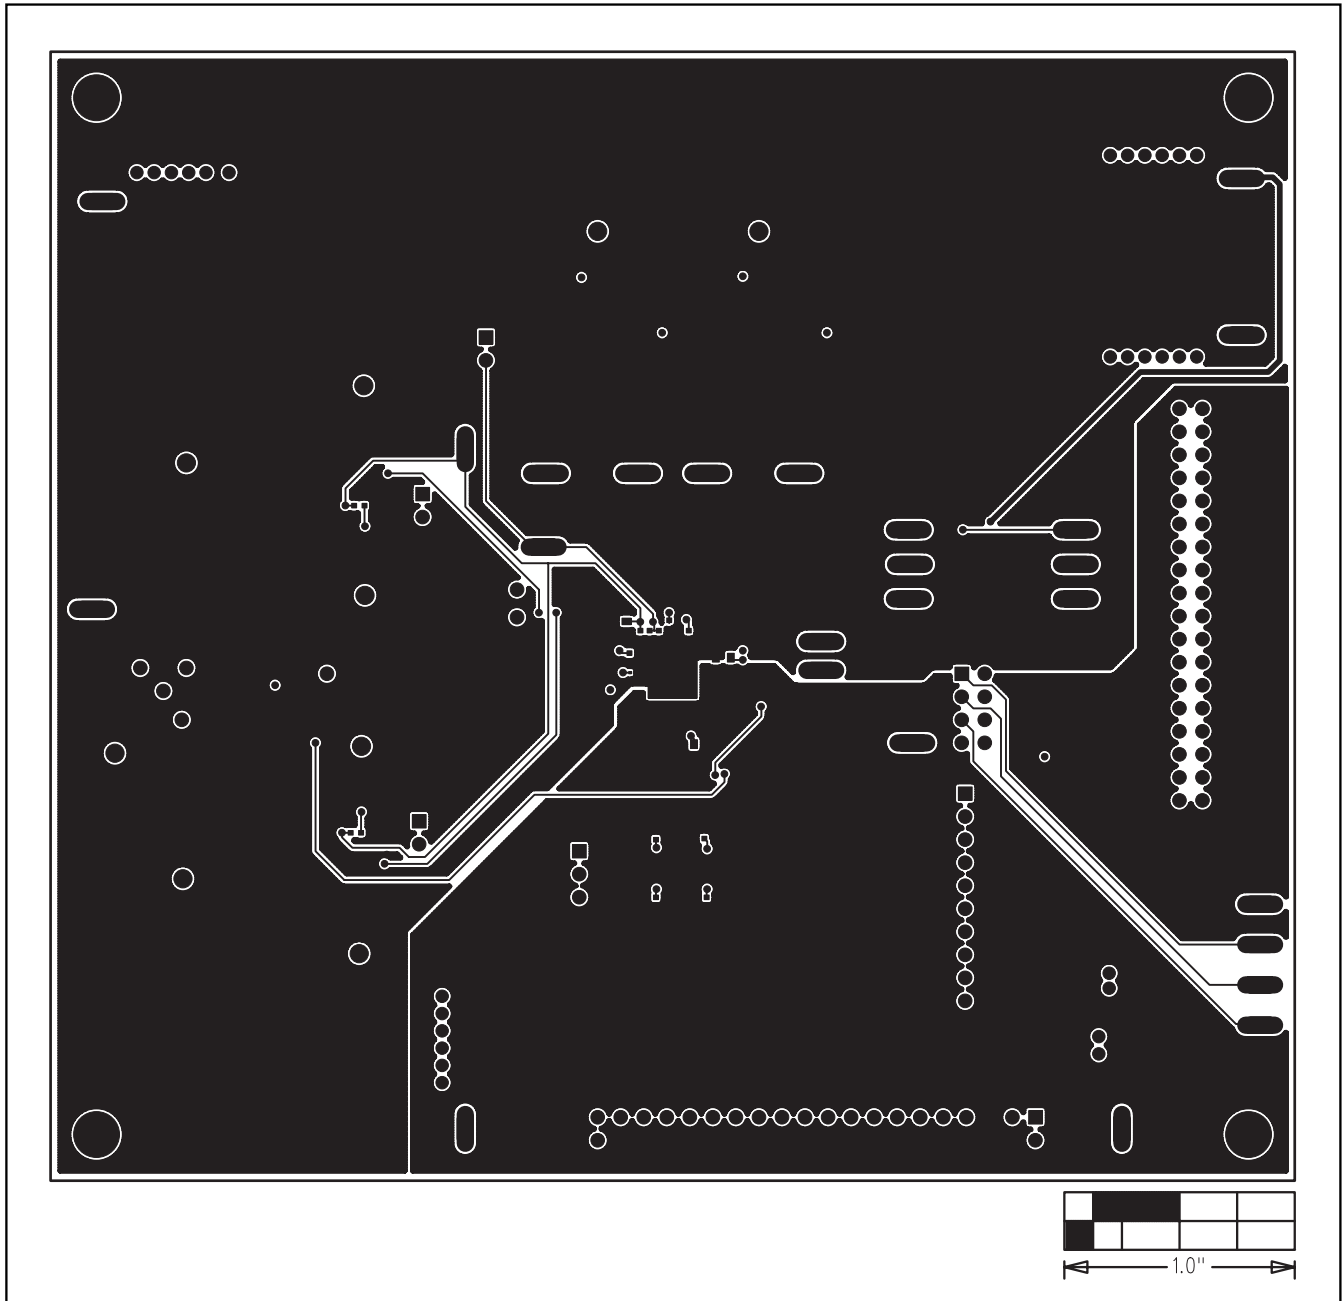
MAX19710-MAX19713 EV Kit PCB Layout—Solder Side
